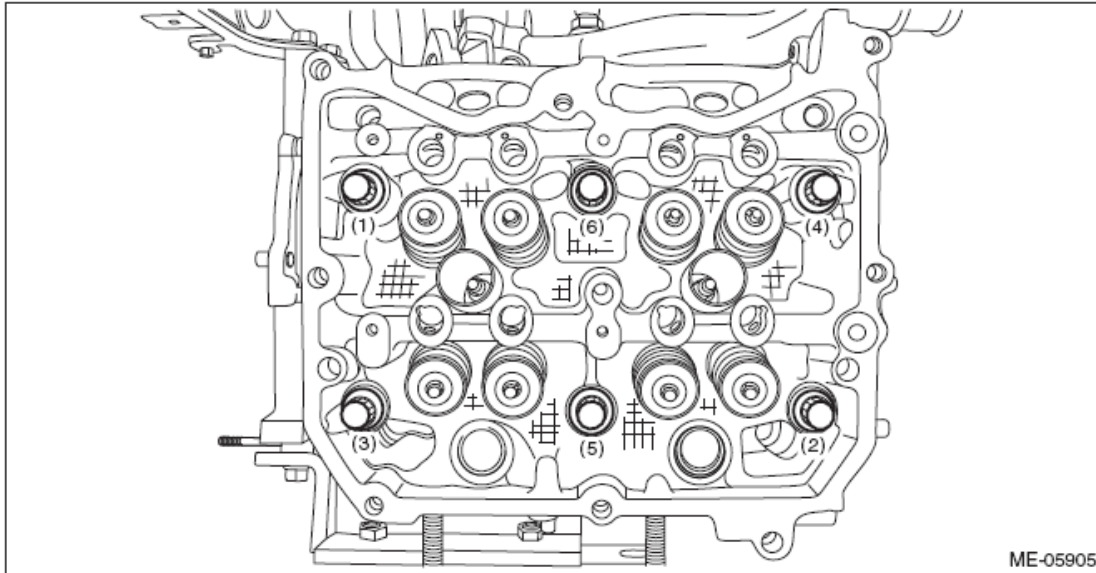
Identifying Cylinder Head Bolts Loosening Sequence
